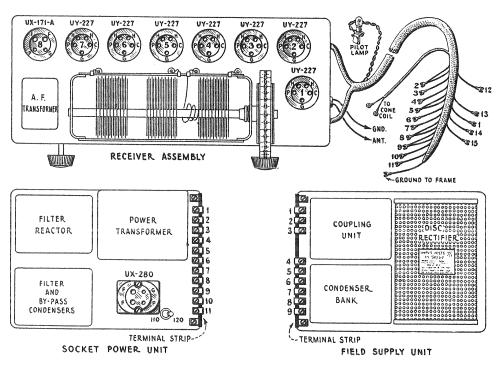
Radiotron socket contacts, location of parts, connection lugs and terminal strips of the socket power and field supply units
